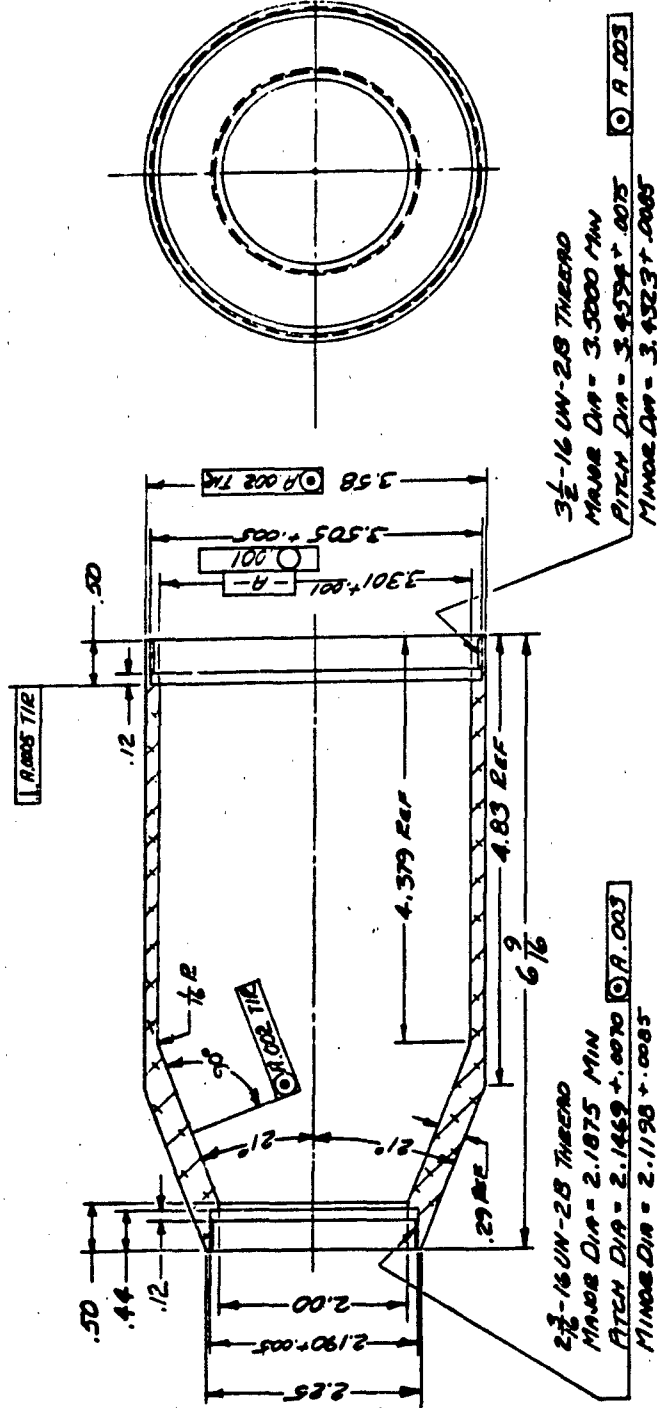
Test Body Assembly - 42° x 3.300 in. Precision Shaped Charge.
